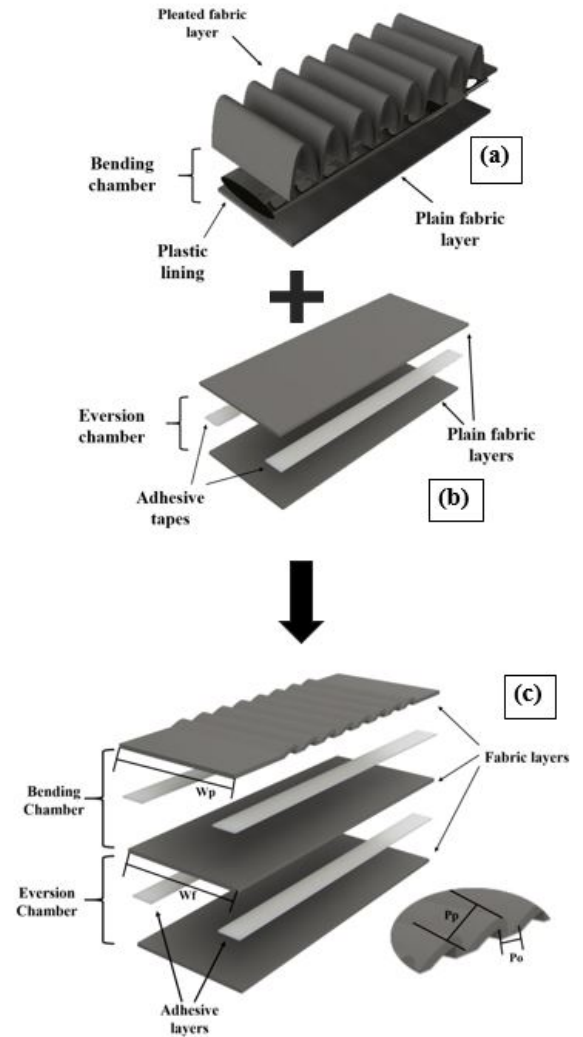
Exploded views of different fabric finger designs: (a) fabric finger capable of bending, showing one pleated layer and one plain layer combined to form a bending chamber lined with plastic layer; (b) fabric finger with eversion capability, two plain layers sewn together to form an eversion chamber, which unfolds when pressurised – the plastic lining is replaced with adhesive tape to reduce the weight of the finger; and (c) final design, a combination of both bending and eversion chambers, made air-tight using adhesive tape.
